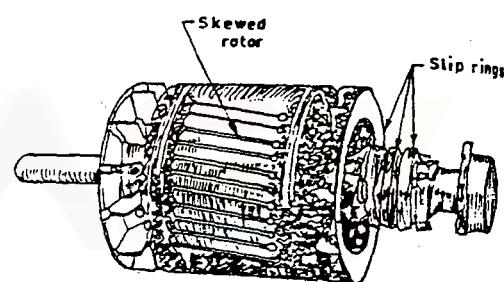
Induction motor with phase-wound rotor, showing the three slip rings on the rotor shaft.
